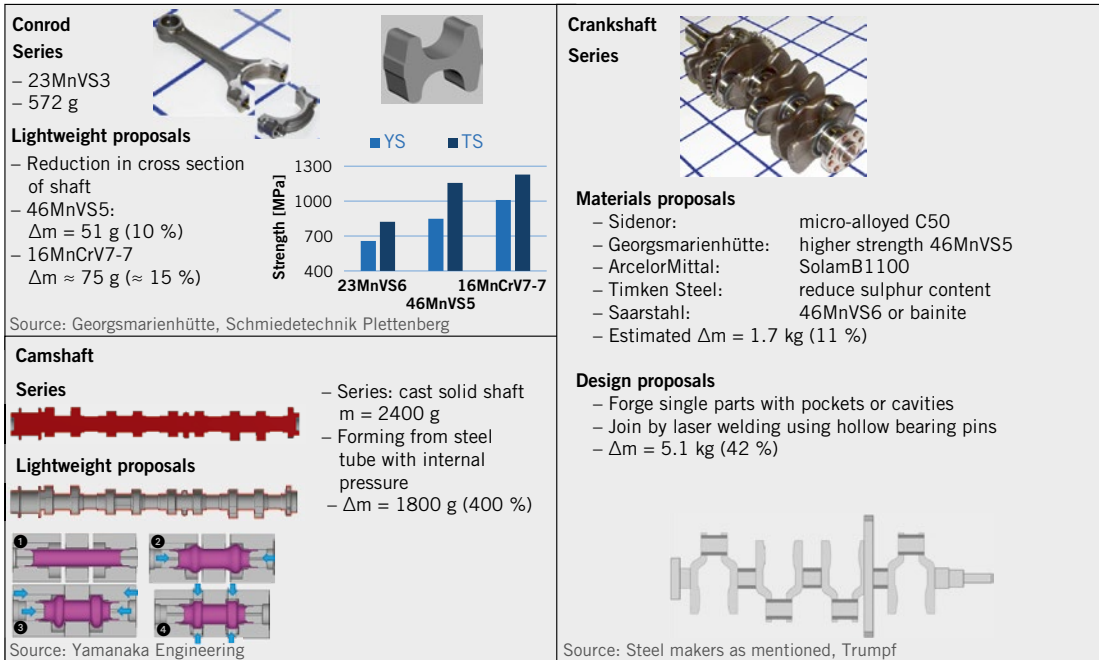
Lightweight design potential in the combustion engine of the split-axle hybrid drive (© Lightweight Forging Initiative)
